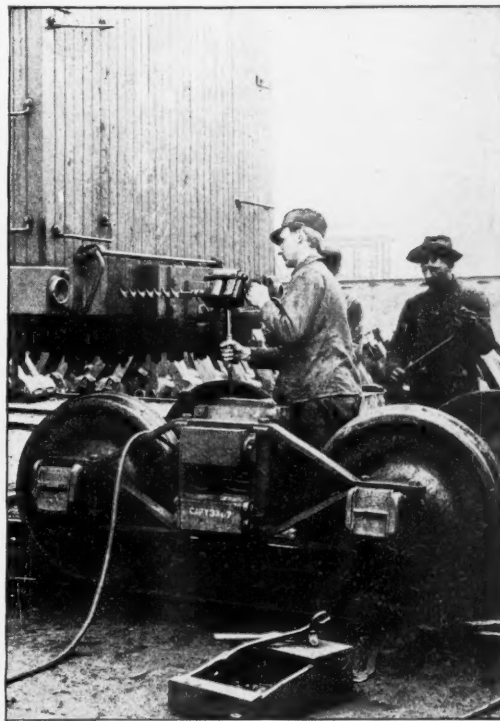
No. 2 Pneumatic Boring Machine in Use.
